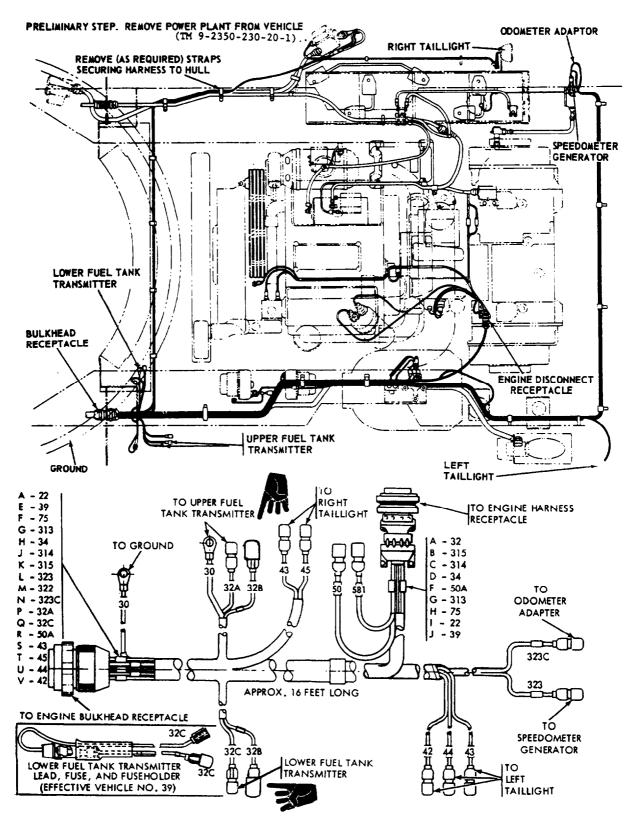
Removal/installation — hull rear wiring harness (1 of 2).
